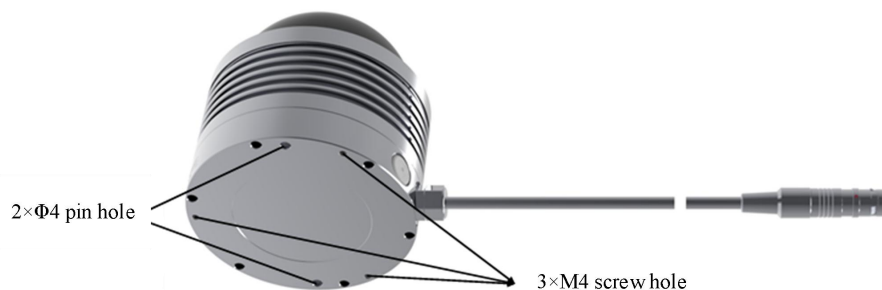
LiDAR Bottom Locator Pin and Screw Diagram
